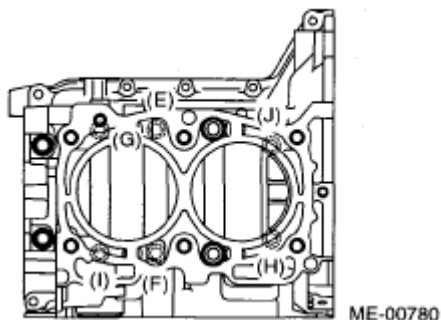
Identifying Tightening Sequence Of Cylinder Block Connecting Bolts (RH Side)
